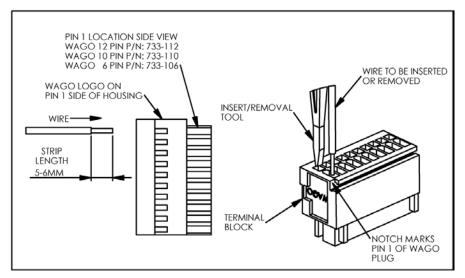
How To Insert and Remove Wires From the WAGO Plug
